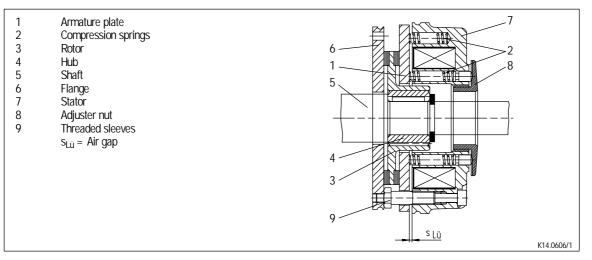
Design of the spring-operated brake BFK458: basic module E (complete stator) + rotor + hub + flange
